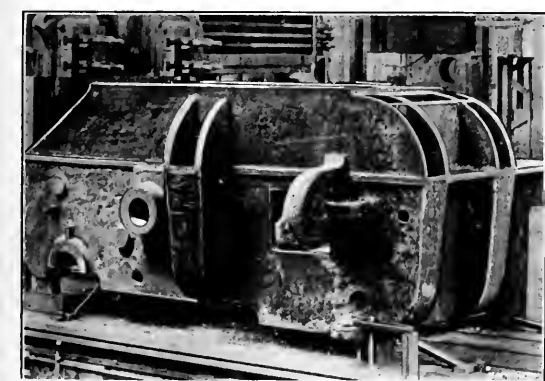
Steel Bed Casting of National Heavy-pattern Forging Machine, showing the Heavy Under-ribbing that extends below the Floor Line
